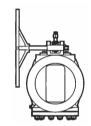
MG* - Sizes 6" to 24" supplied with fully enclosed gearing
